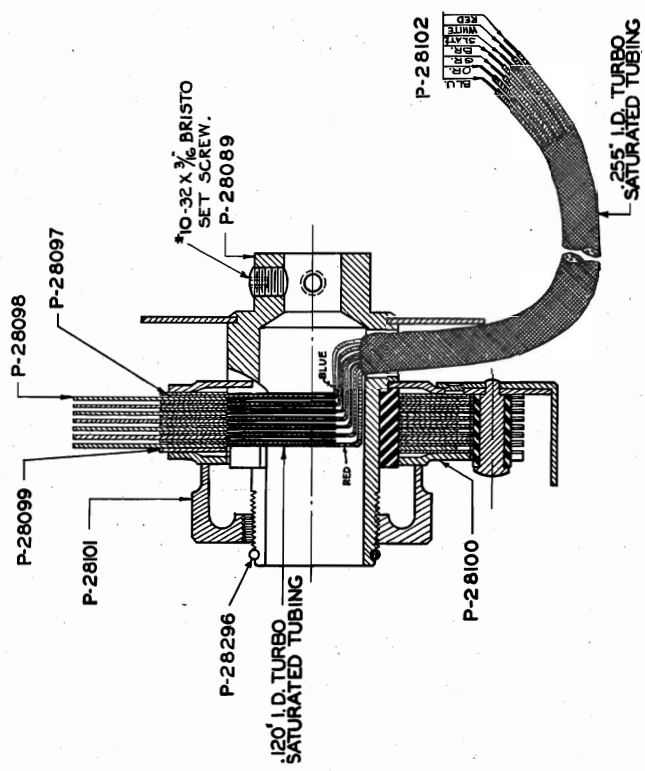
Section View of Flash Tuner Contactors Assembly.
